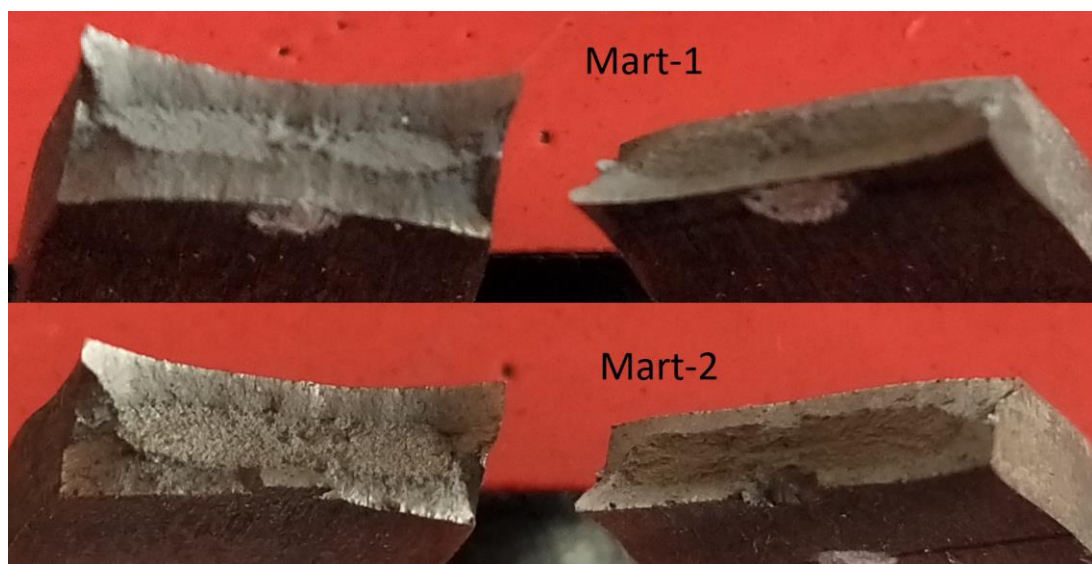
Side View of Fractured TM-400 Tensile Test Specimens
